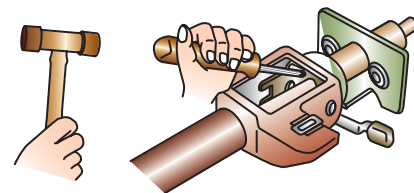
Removing compression spring, seat, and bushing.
